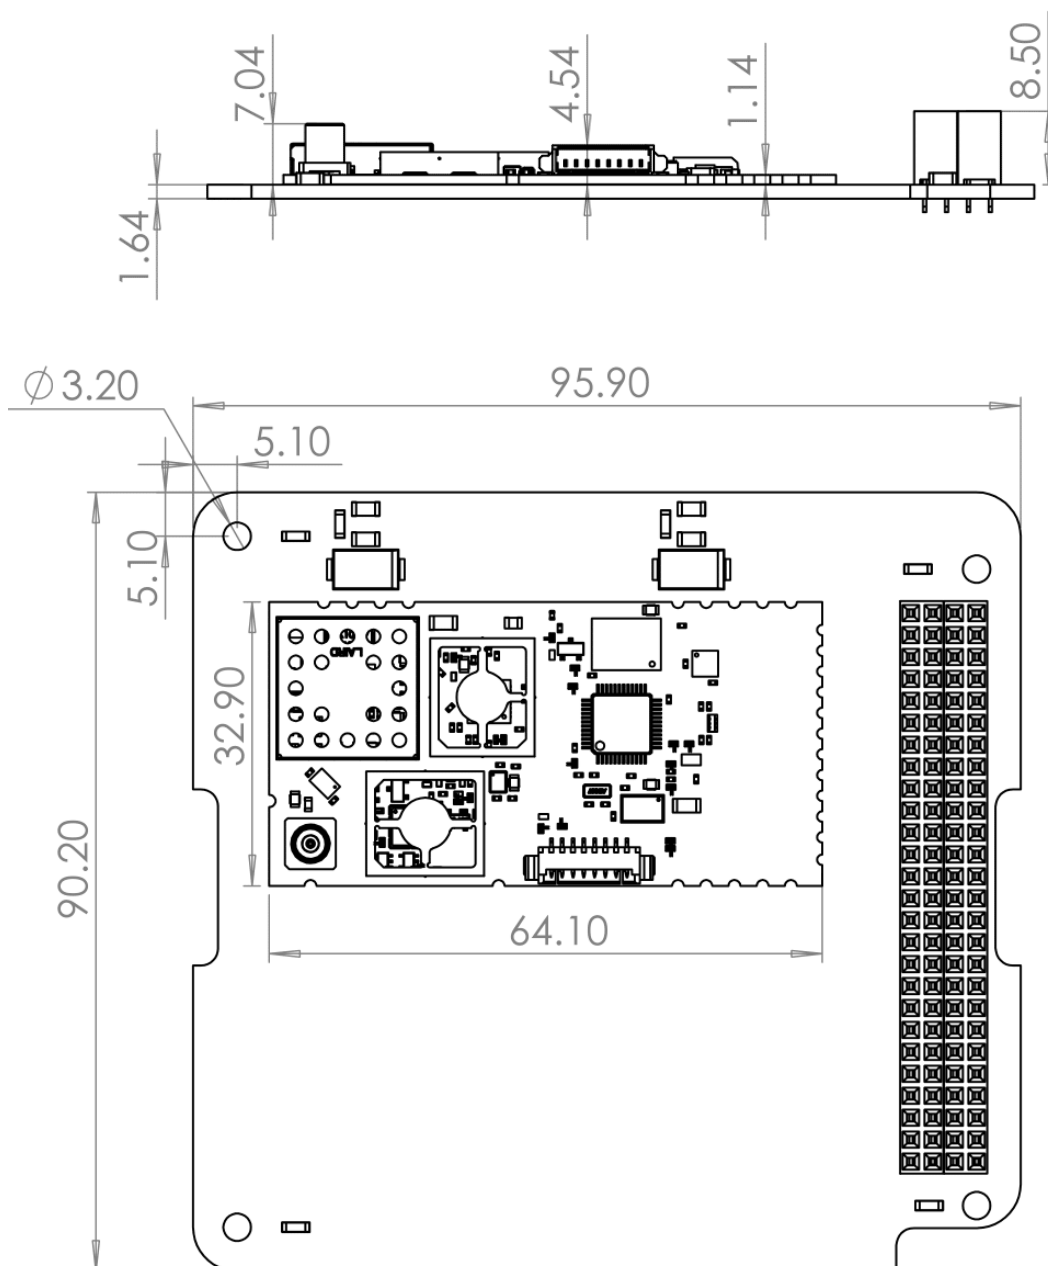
UHF Radio Dimensions, Mounted on a PC/104 Standard Complying PCB Board
